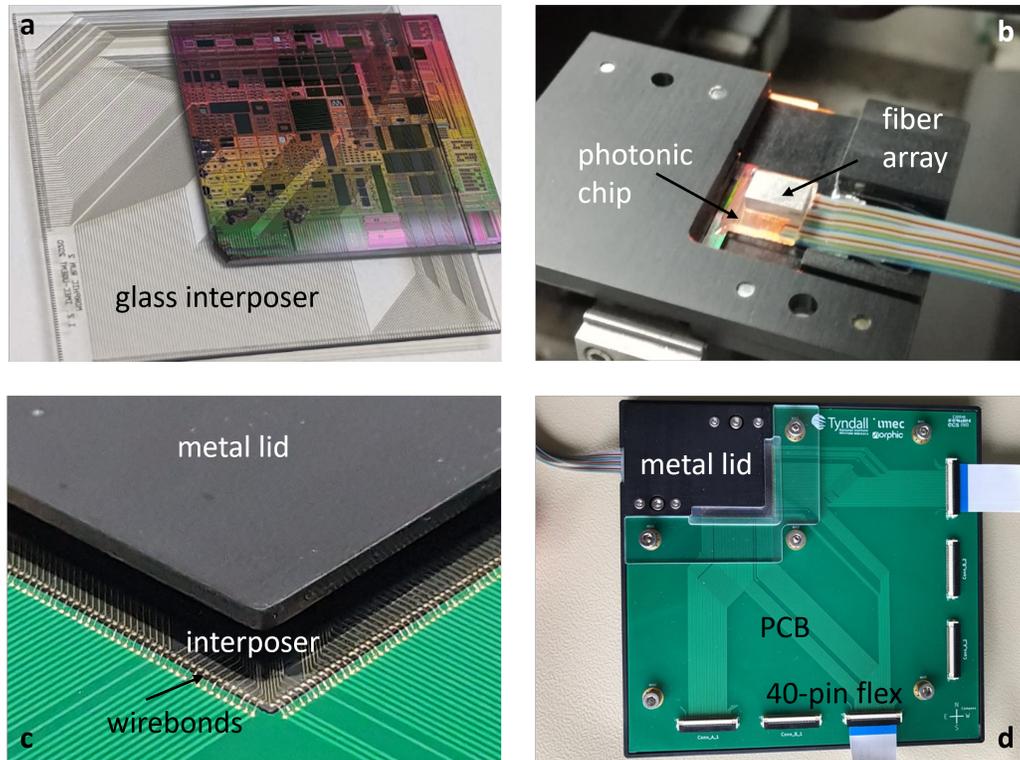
Example of packaging approach for smaller-scale circuits. (a) the photonic chip is mounted on a single-layer interposer (glass or Si). (b) The fiber array is attached. (c) The edge pads of the interposer are wire-bonded to a PCB, (d) The final package encapsulates the photonic chip assembly in a metal housing.
